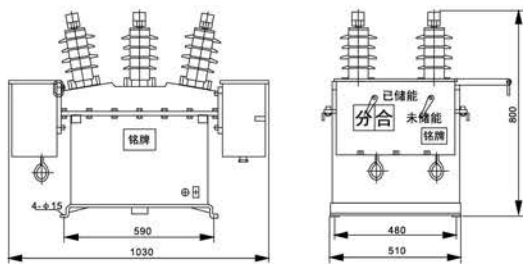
Outline Drawing and Mounting Dimensions of ZW8-12 with Electronic PT Circuit Breaker
